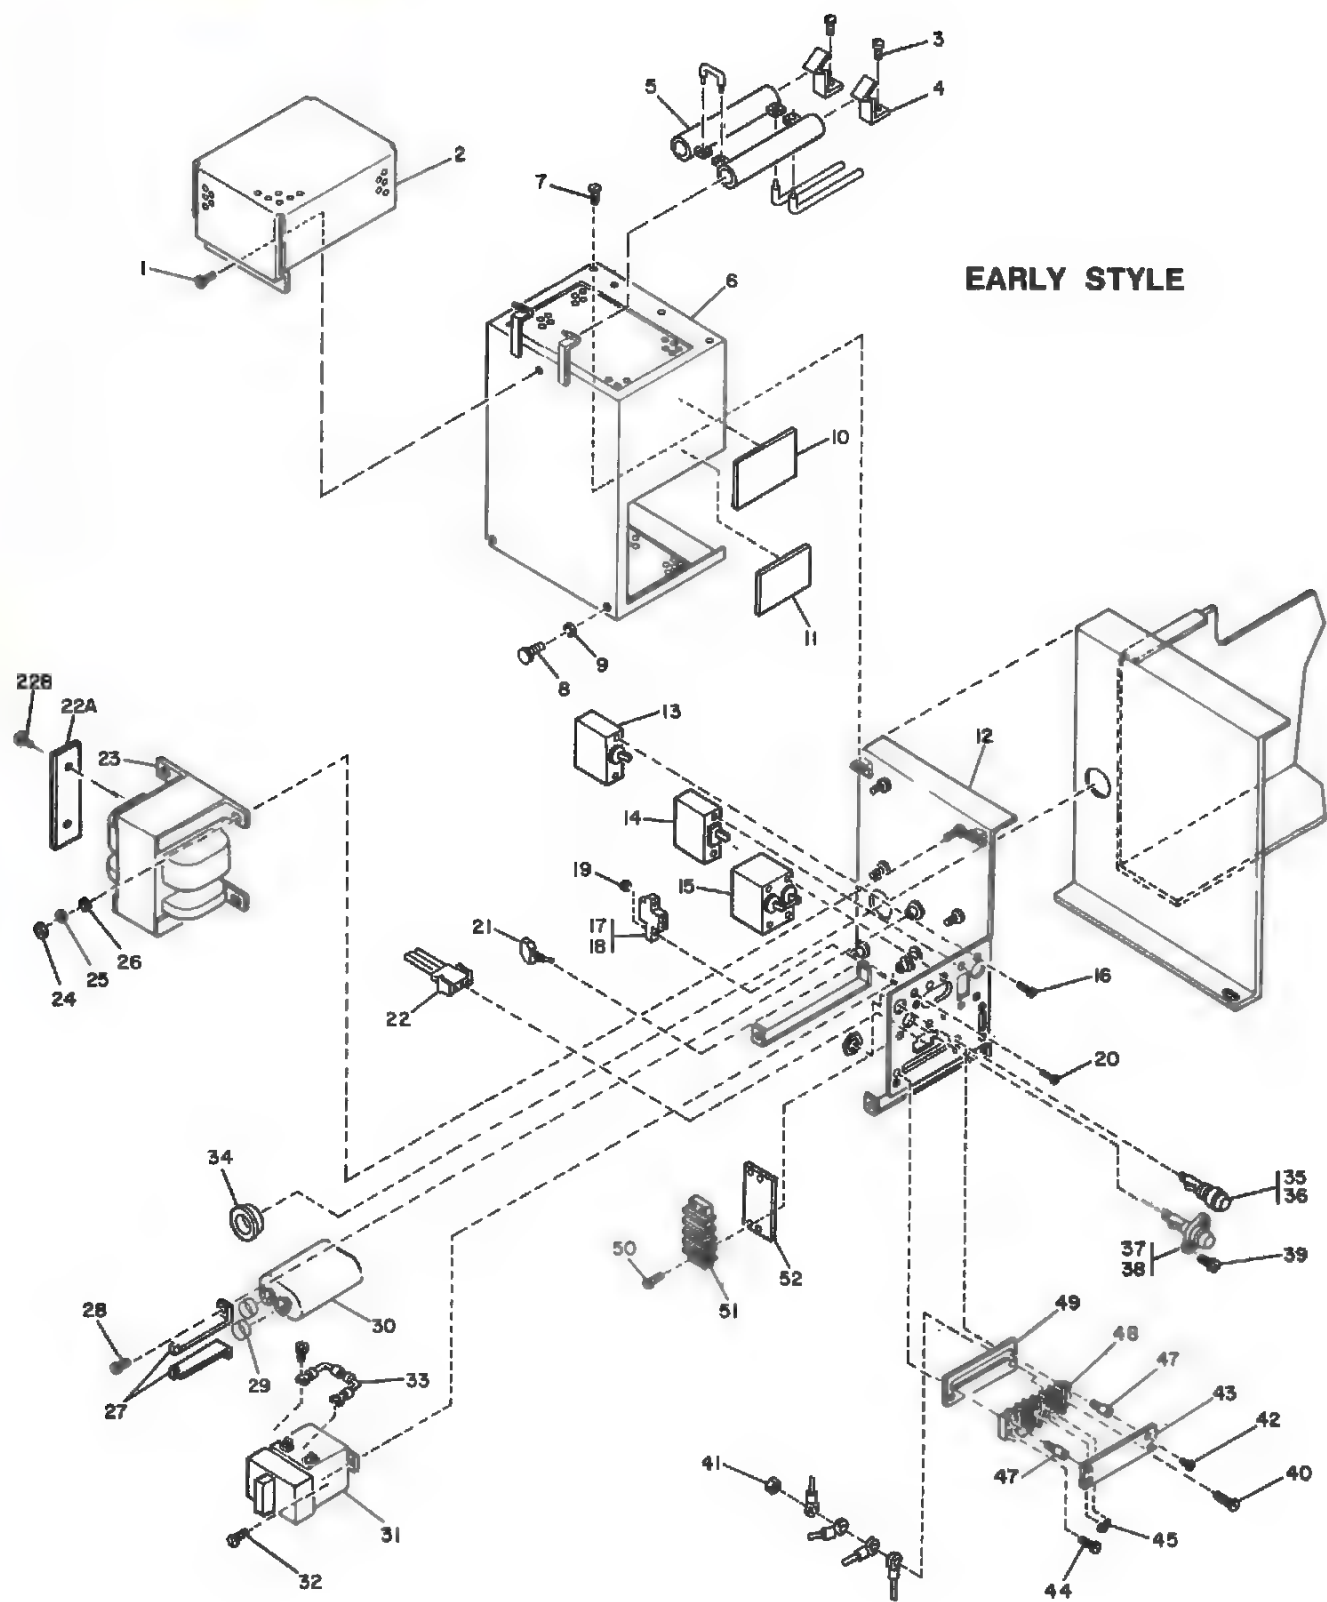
TRI-LEVEL POWER SUPPLY ASSEMBLY. SHEET 1 OF 2. INDEX NOS. 1-52. SEE LIST 9.
